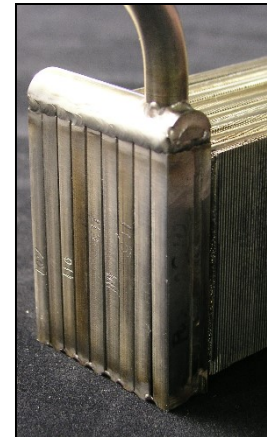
Assembled core consisting of multiple cell sub-assemblies.
